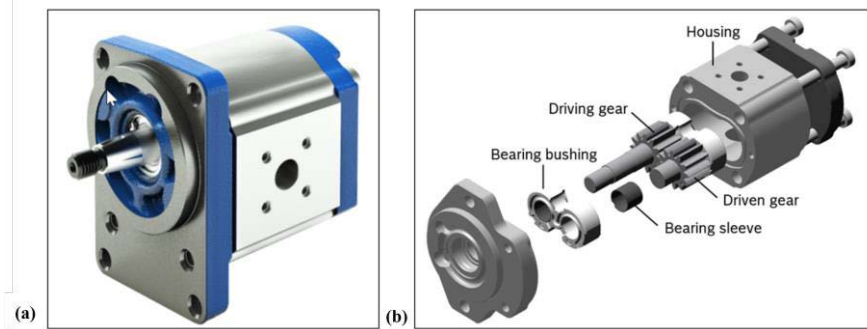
(a) Picture of a Rexroth external gear pump, (b) external gear pump components
